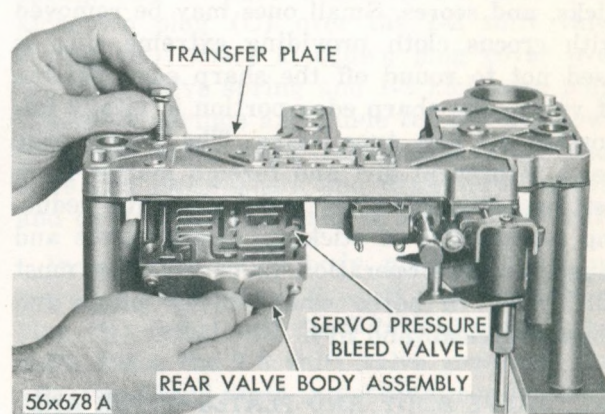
Removal and Installation of Rear Valve Body Assembly
